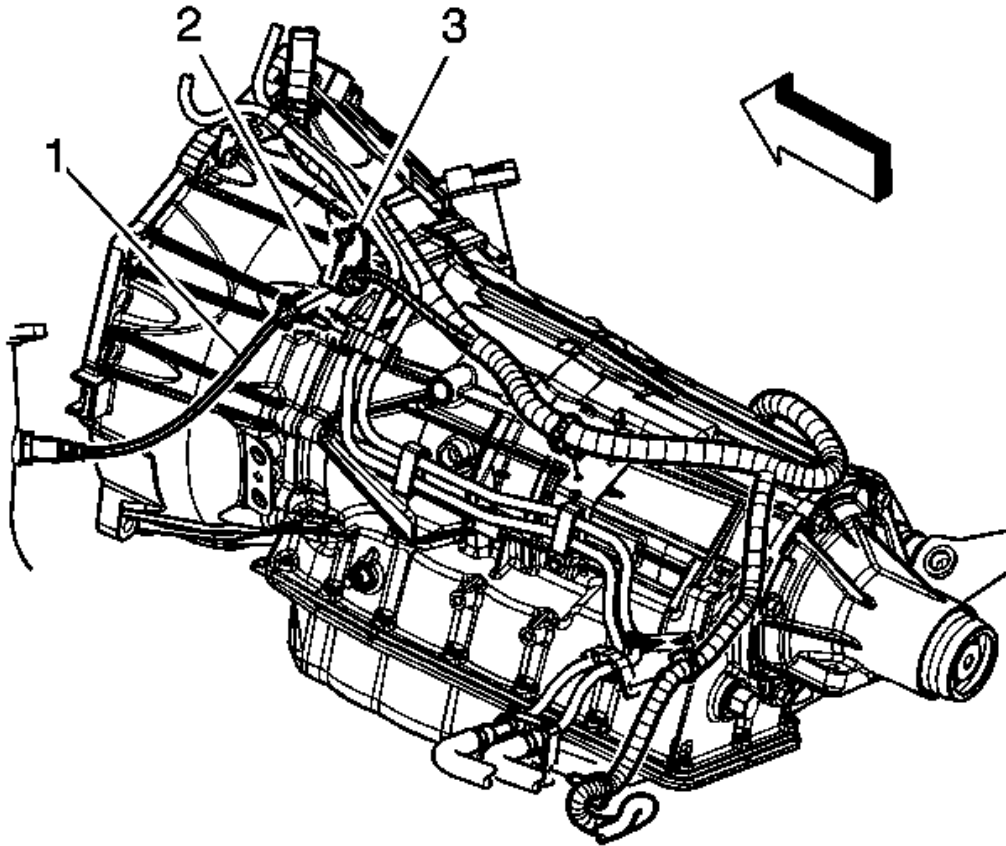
View Of Front HO2S, Electrical Connector & CPA Retainer
